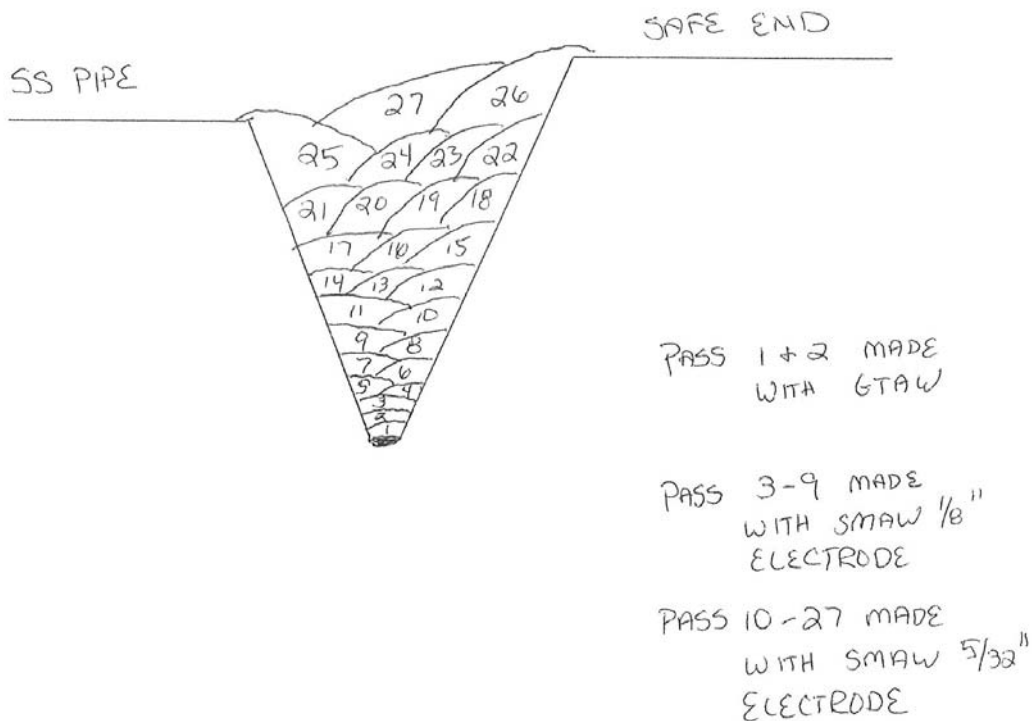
Weld Pass Map for WOM Safe End to Stainless Pipe Weld
